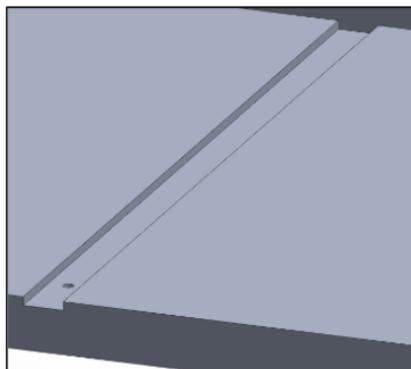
3D CAD close-up of slotted tracks and pinholes.
